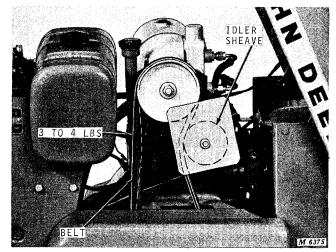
Adjusting Belt Tension 110 and 112 Tractor with Tecumseh Engine-In-Line Unit
